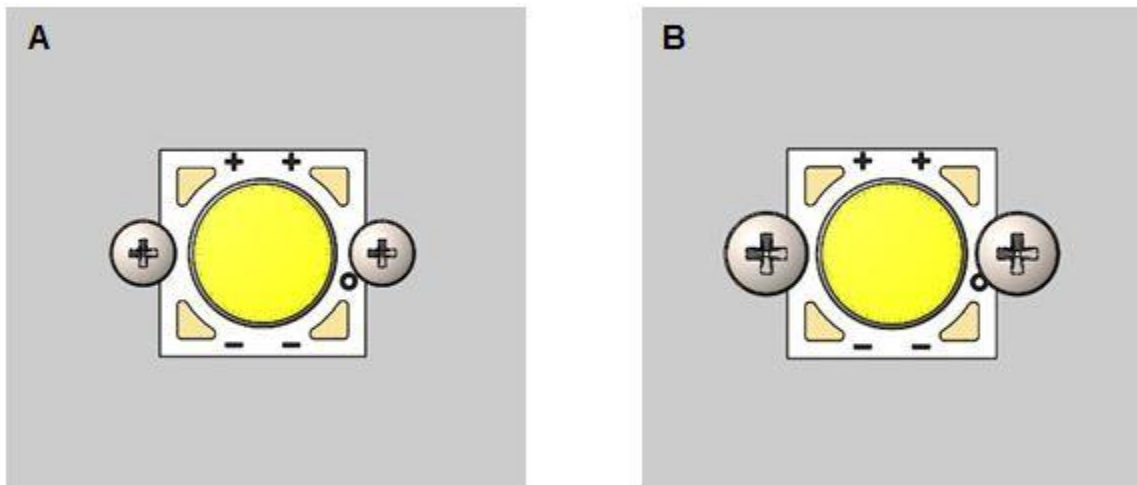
Screws securing Bridgelux V Series Array to Mounting Surface.
